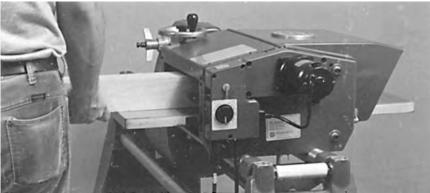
To feed a board into the planer, hold the board parallel to the sides of the table; then push it forward until the infeed roller grabs it. Continue to support the board as needed, but do not push or pull the board once the rollers are feeding it through the planer.
